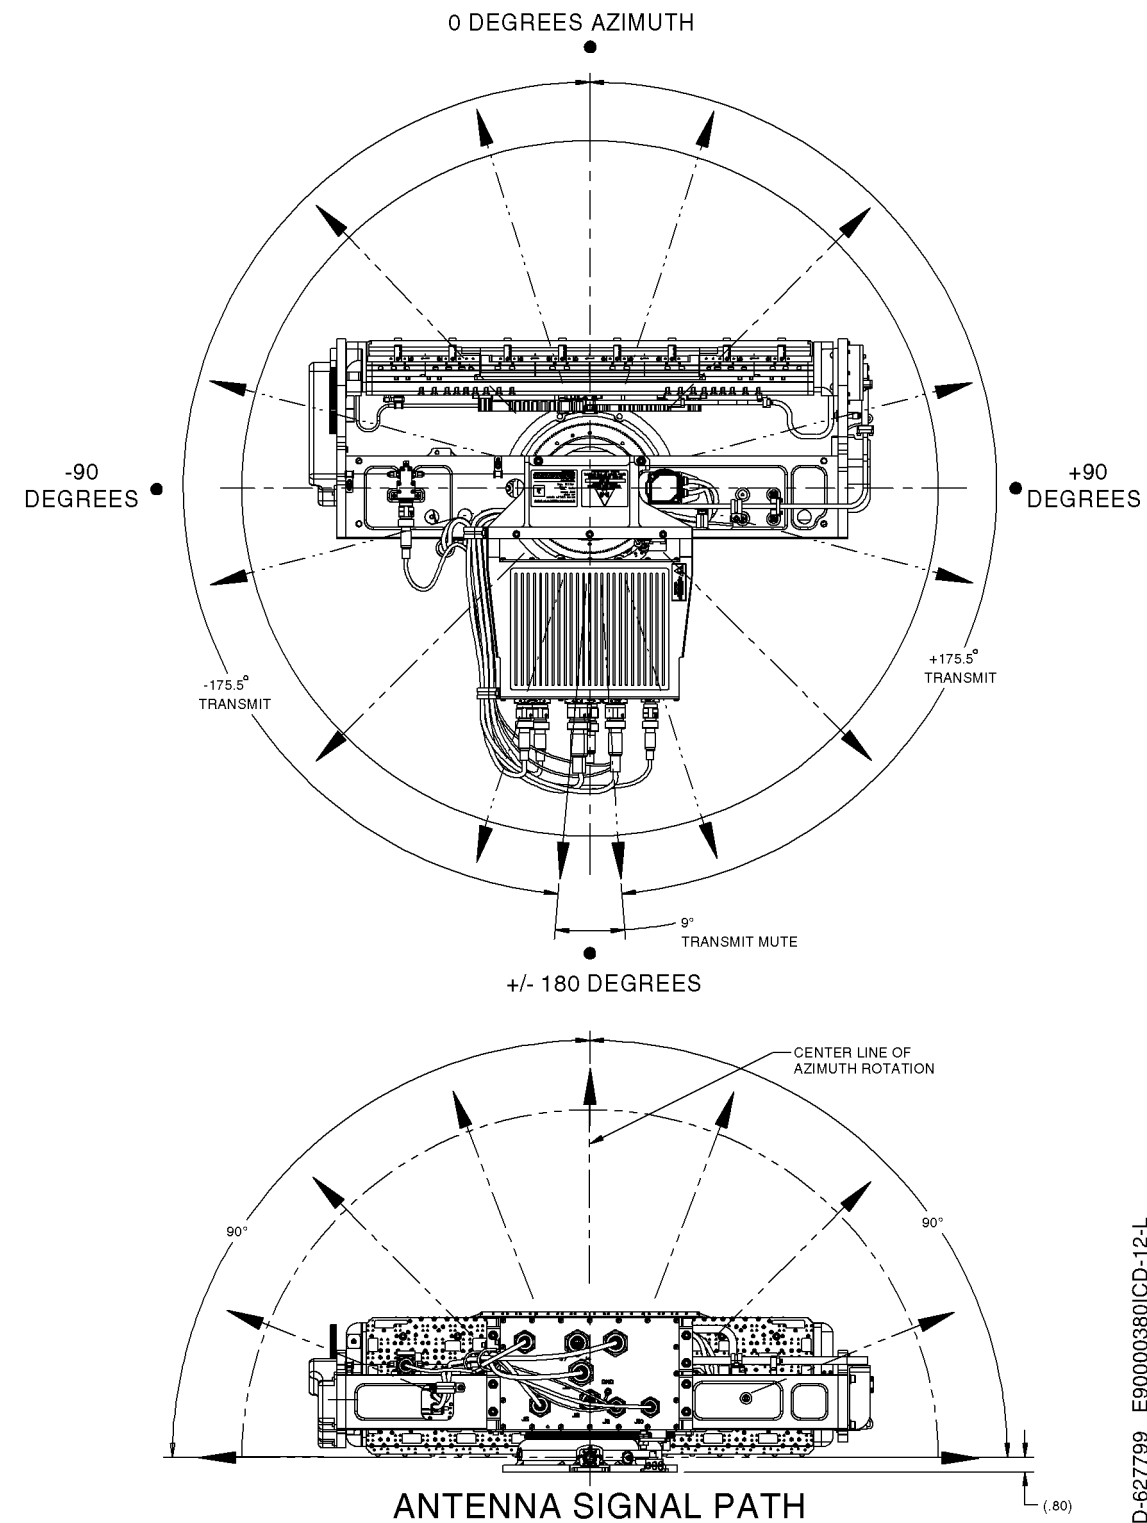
(Sheet 12 of 14) FMA Outline and Installation Drawing (90000380ICD, REV L)
